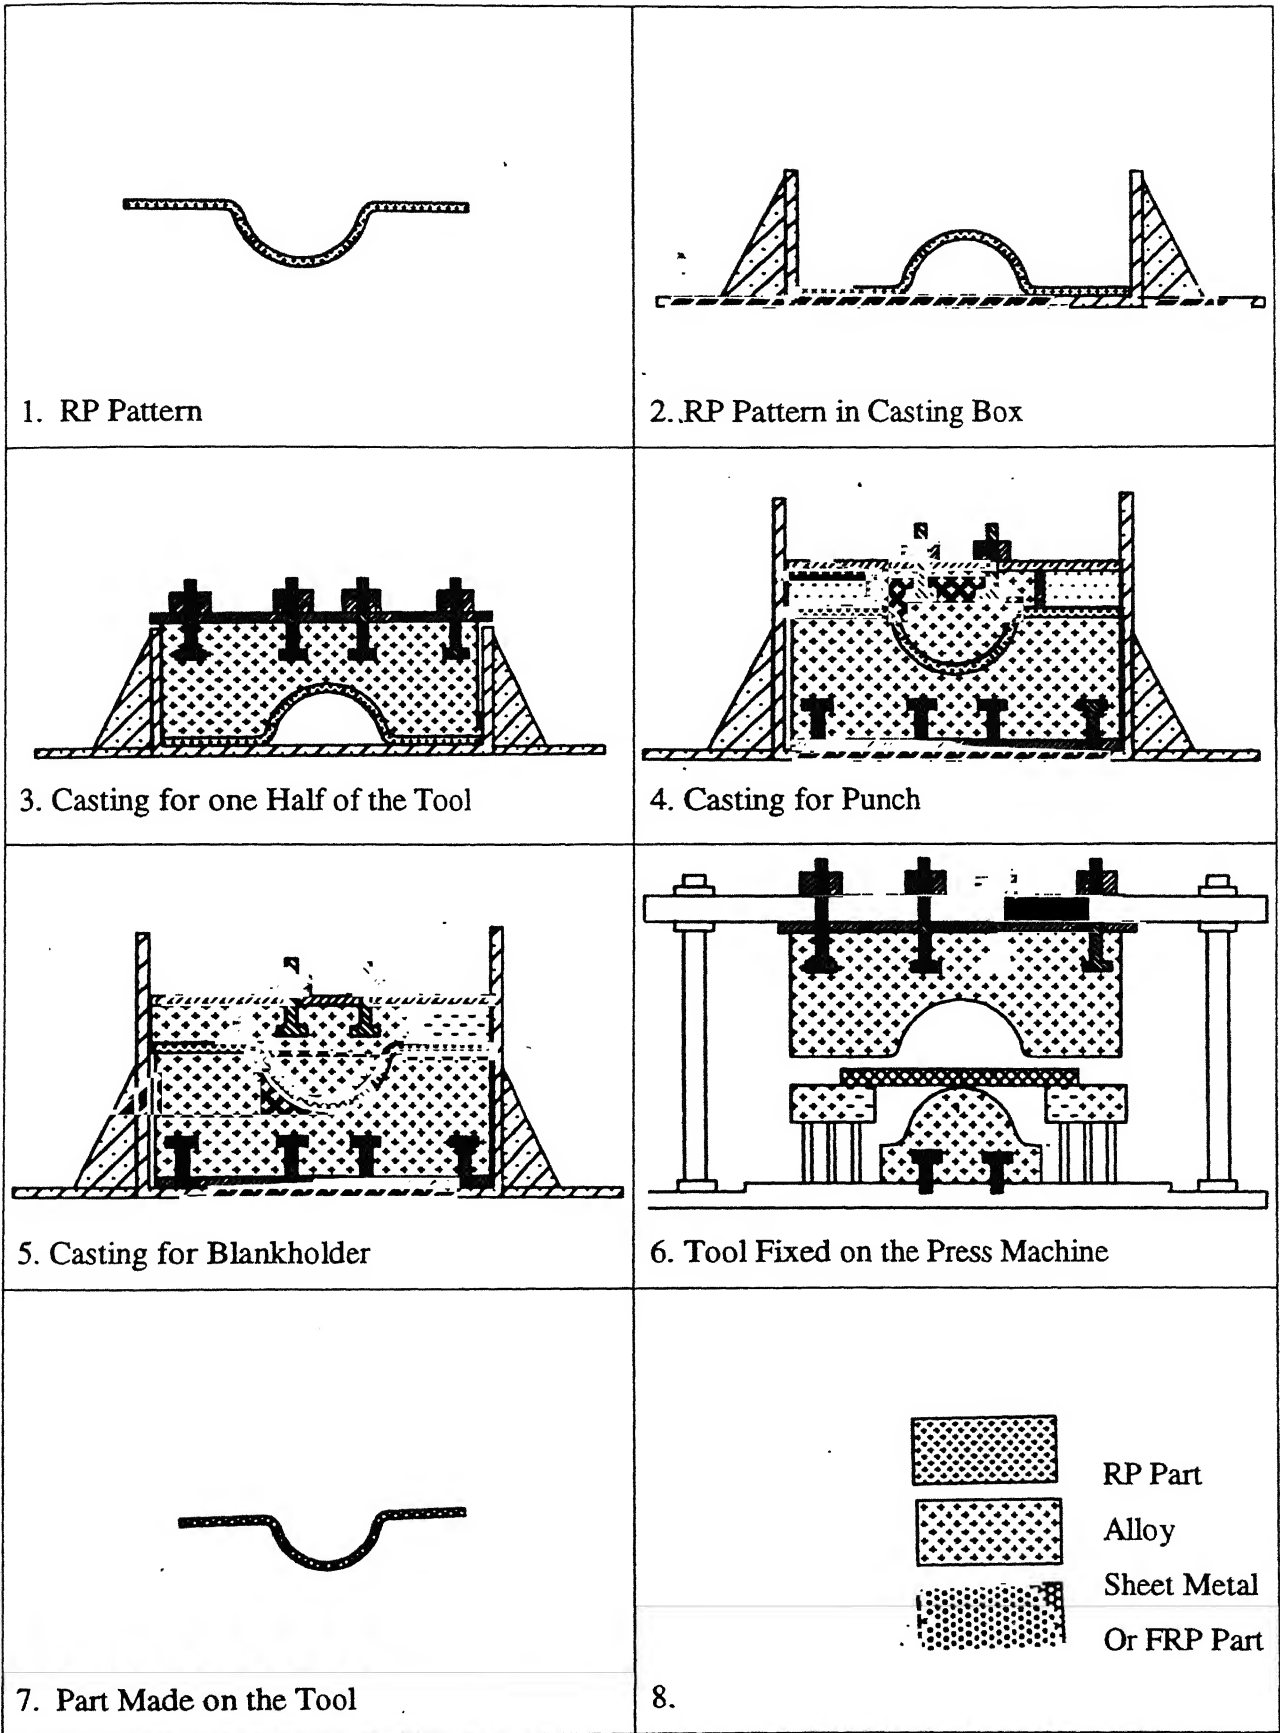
Process of making three-part Press Tool without Using Wax Sheet
